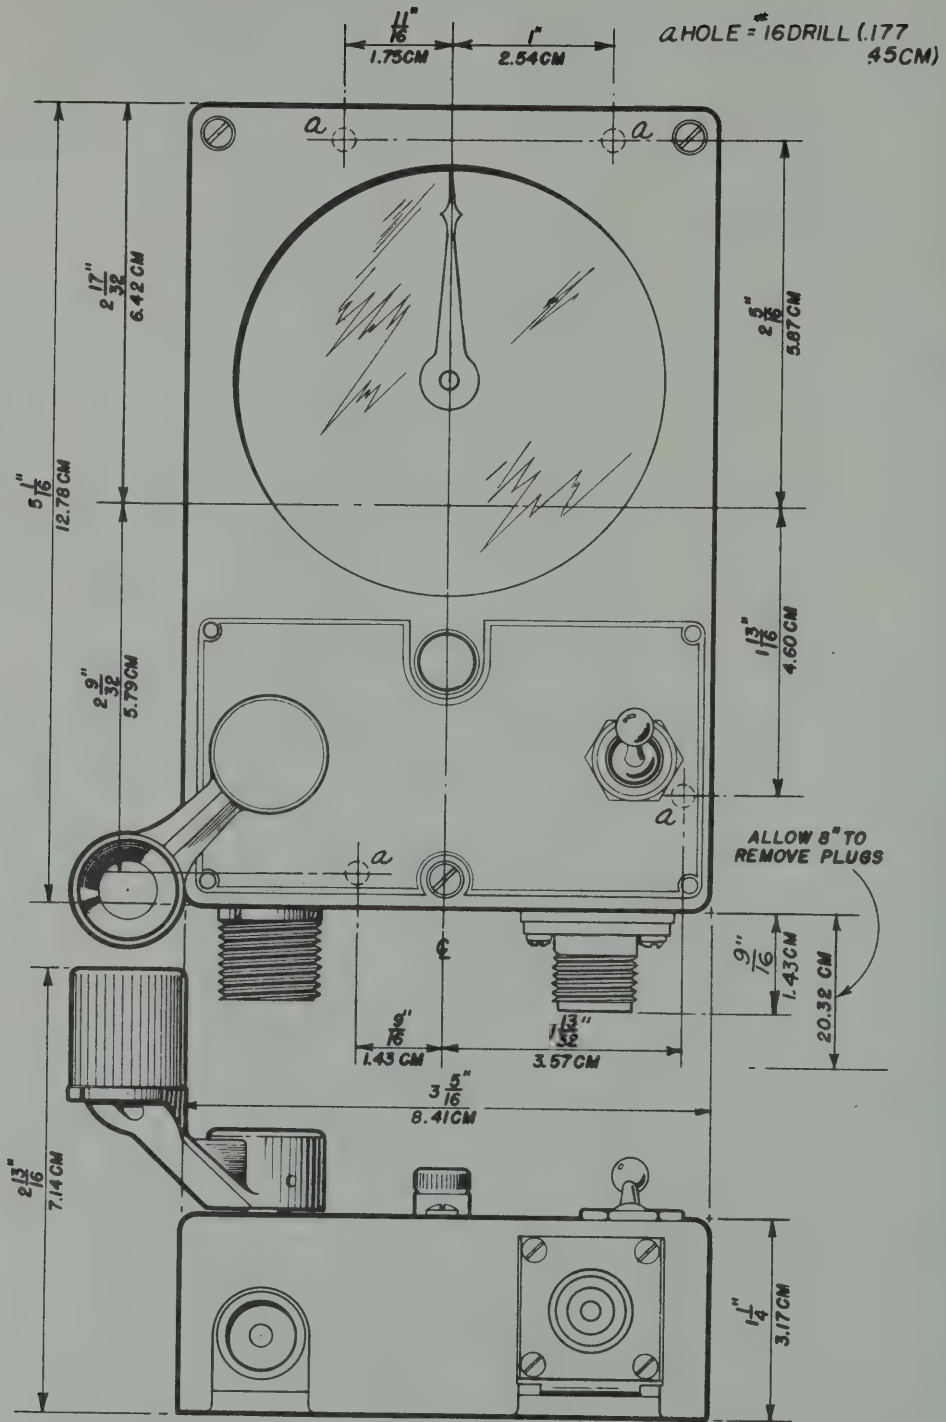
TYPE MN-52G AZIMUTH CONTROL, OUTLINE DIMENSIONS
